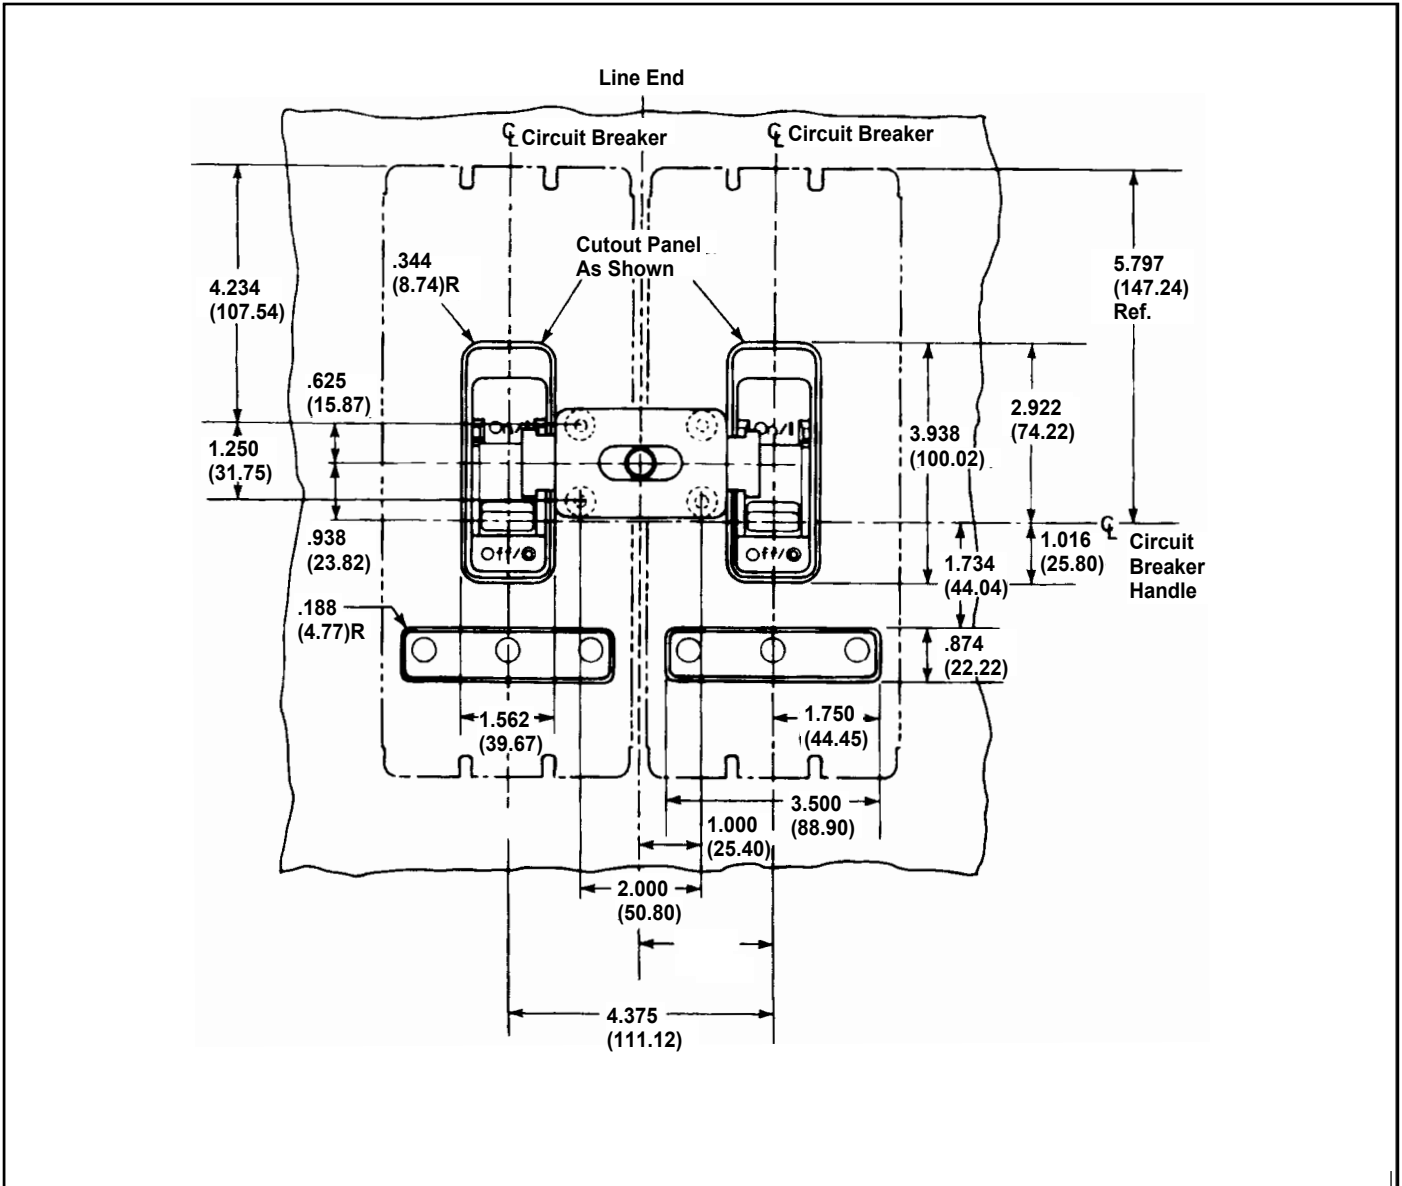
J-Frame Sliding Bar Interlock Installation Details.
